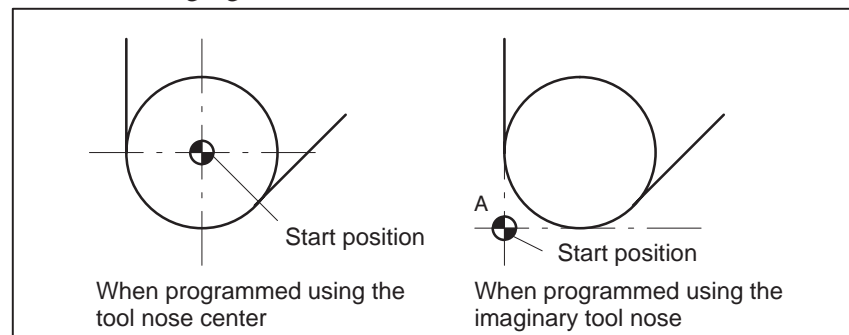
(a) Tool nose radius center and imaginary tool nose
